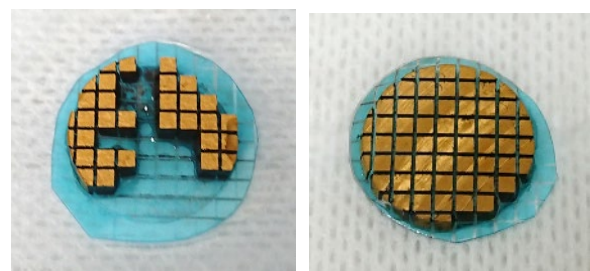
Photographs of Si pellets after dicing. The left photograph shows the Si pellet diced at 20,000 rpm and the right one shows Si pellet diced at 30,000 rpm
